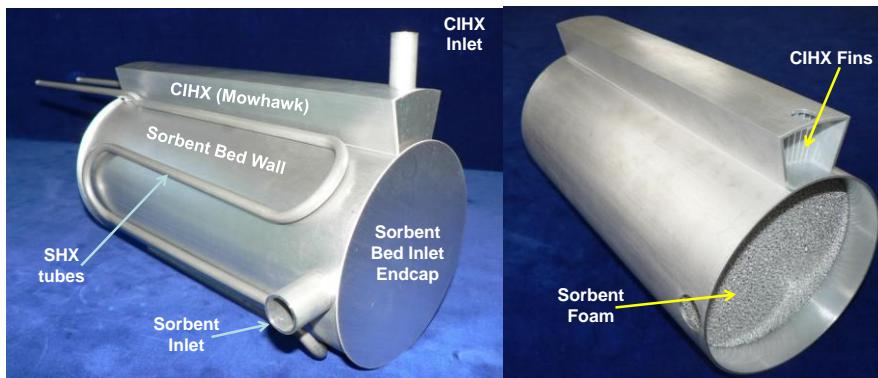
Pre-Braze mock assembly of the MTSAs EDU
